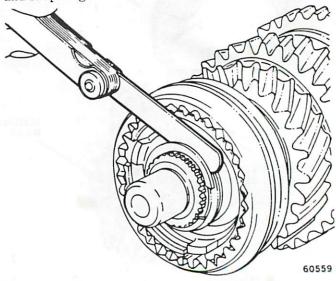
B-66 Checking Mainshaft Geartrain End Play
